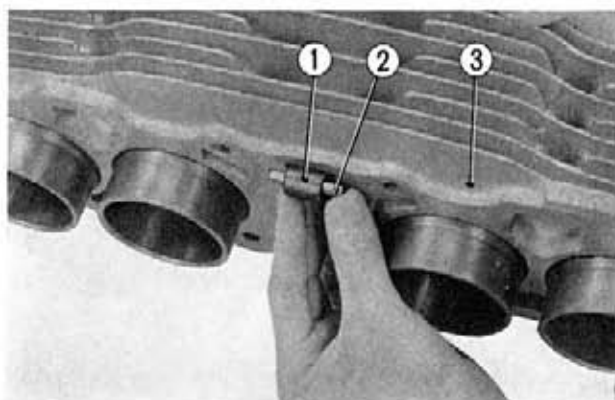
① Cam chain guide ② Cam chain guide pin ③ Cylinder
